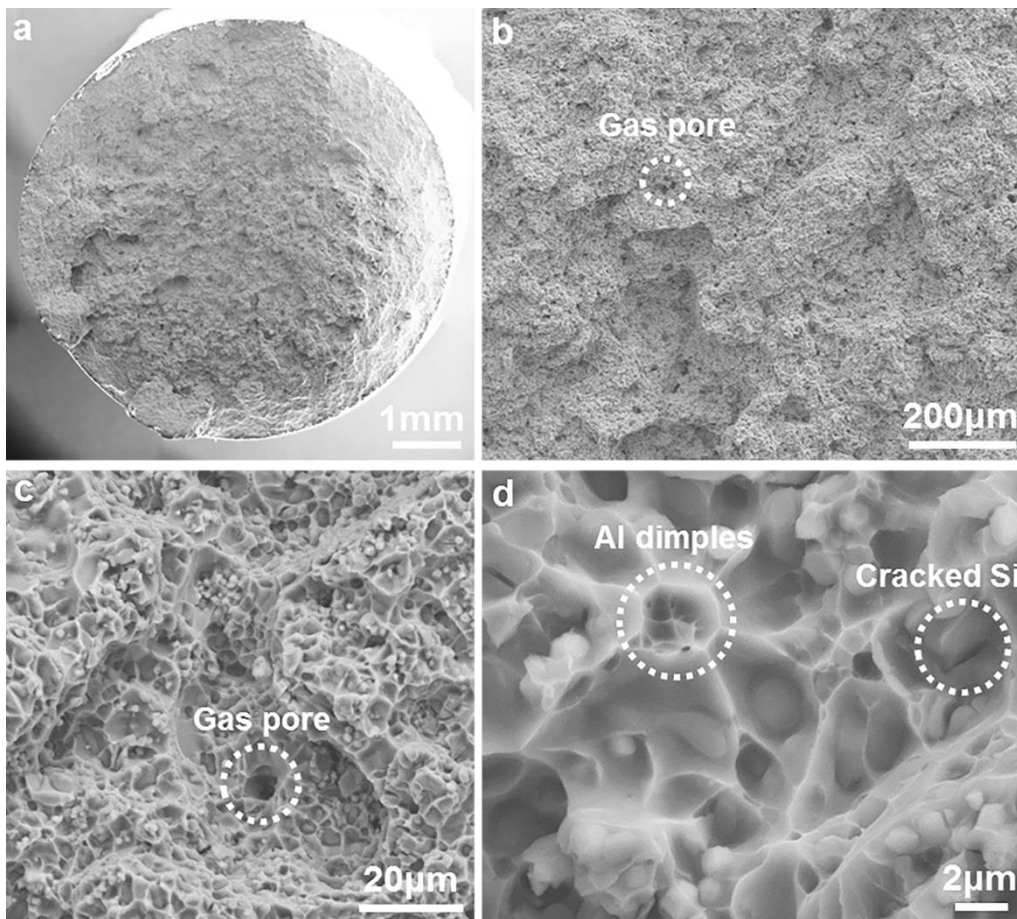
SEM morphology of the fracture surface of the AlSiCuMgMn alloy processed by high pressure die casting after T6 heat treatment, (a) macroscopic fracture of the tensile bar, (b) gas pores on the fracture surface, (c,d) the enlarged fracture surface.
